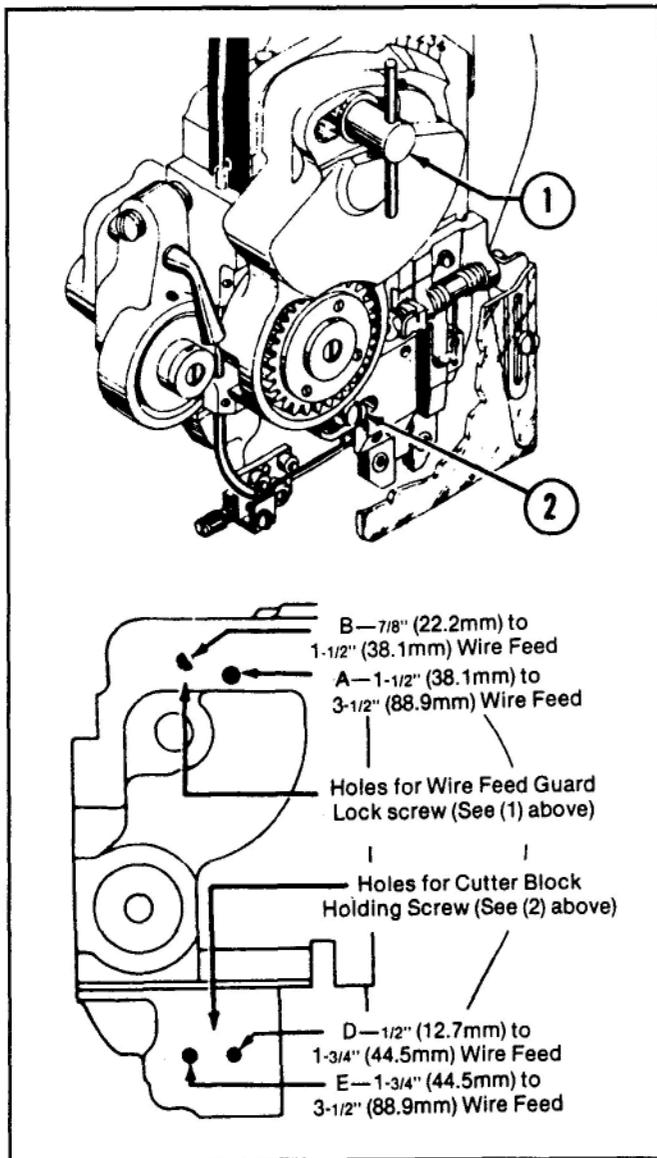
Positioning Wire Feed Lock Screw and Cutter Block Holding Screw
